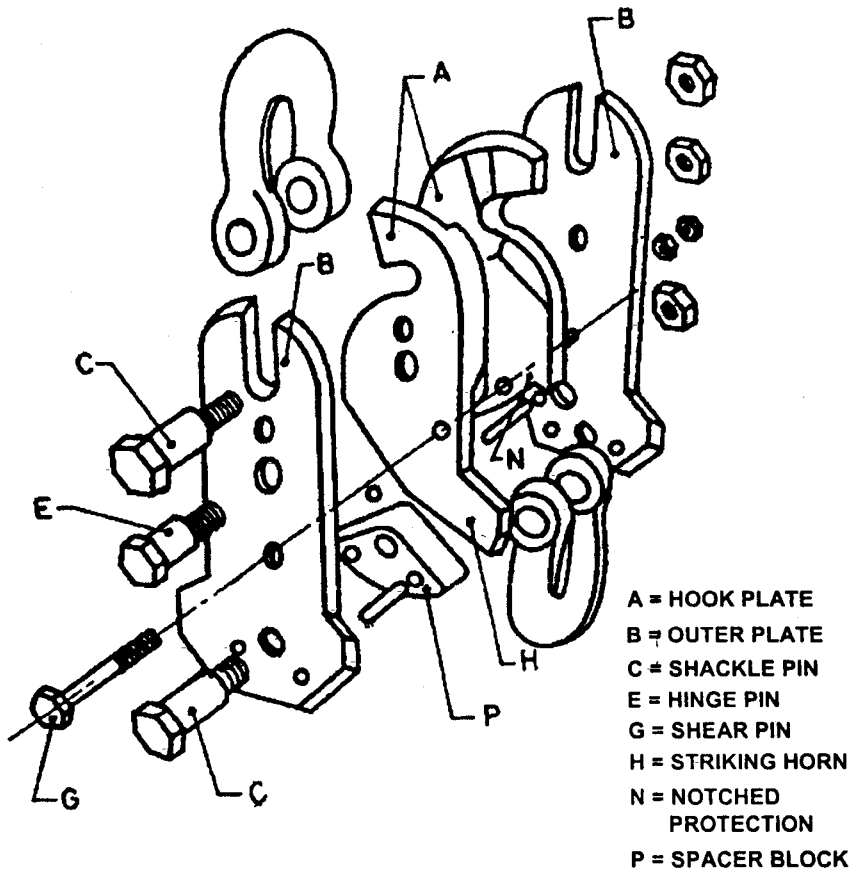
DETACHING HOOK EXPLODED DIAGRAM
